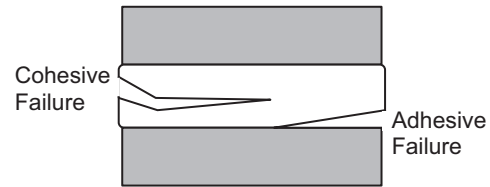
Schematic of Adhesive and Cohesive fatigue fracture modes in an adhesive joint.
